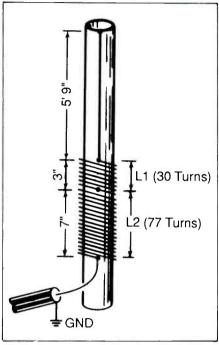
Loading coil assembly. Coils are tapped as per instructions.
